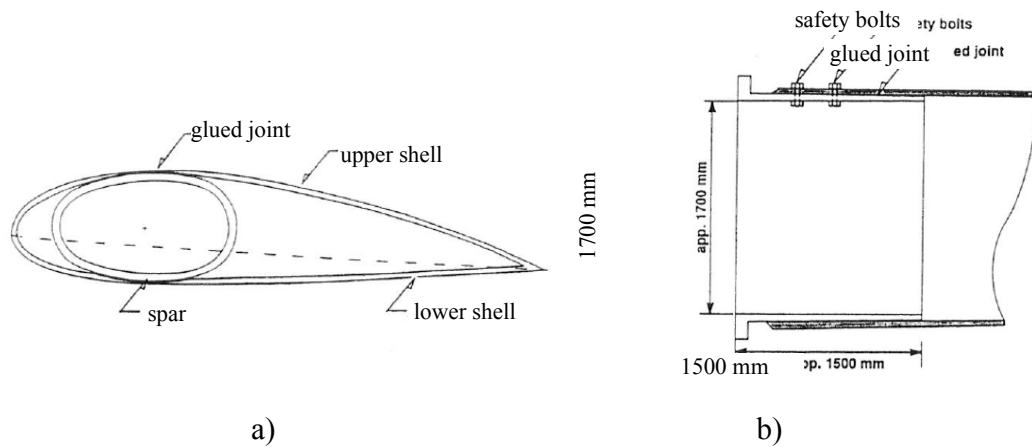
Construction details of the Tjaereborg turbine blades [21]. a) cross-section details, b) steel flange attachment details.
